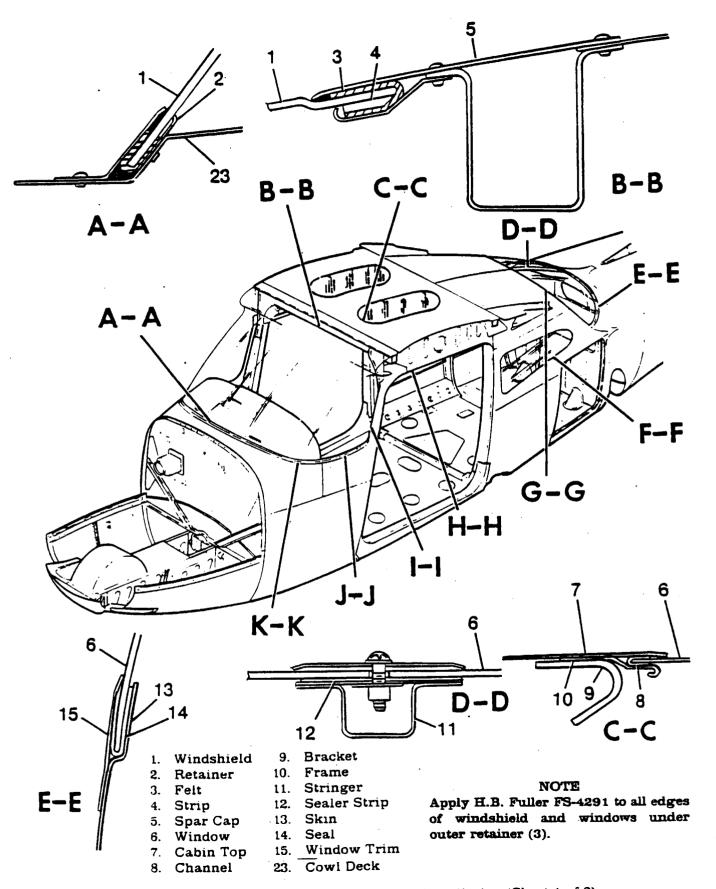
Windshield and Fixed Window Installation (Sheet 1 of 2)
